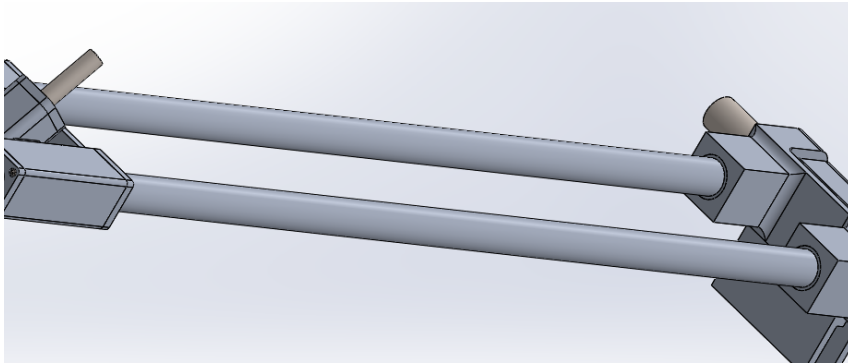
Spline Shaft used to Adjust Rail Angle
